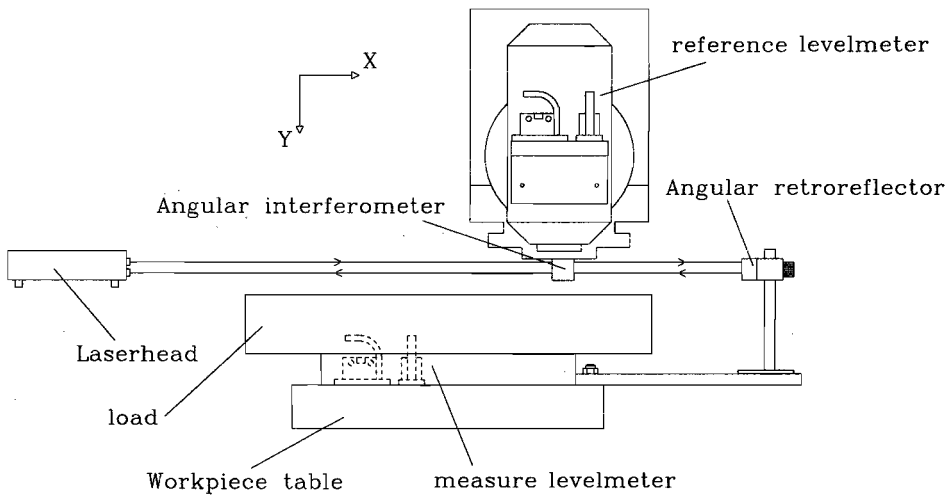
Experimental setup applied for the measurement of the rotation errors due to a workpiece weight.
